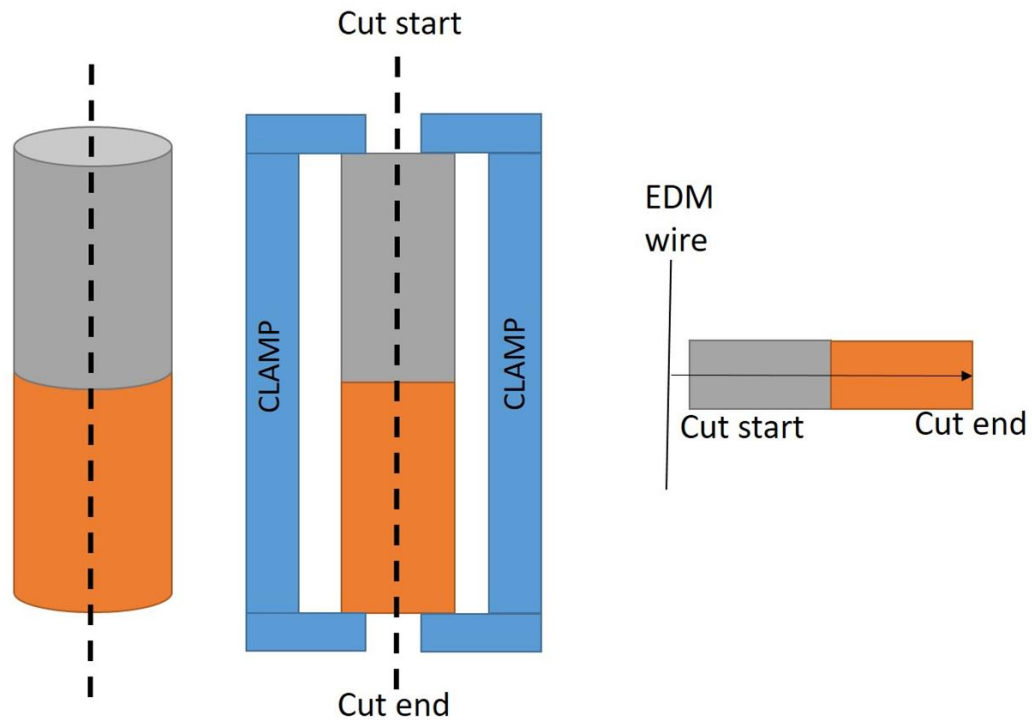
EDM clamping arrangements for Contour Method sectioning of dissimilar material brazed parts
